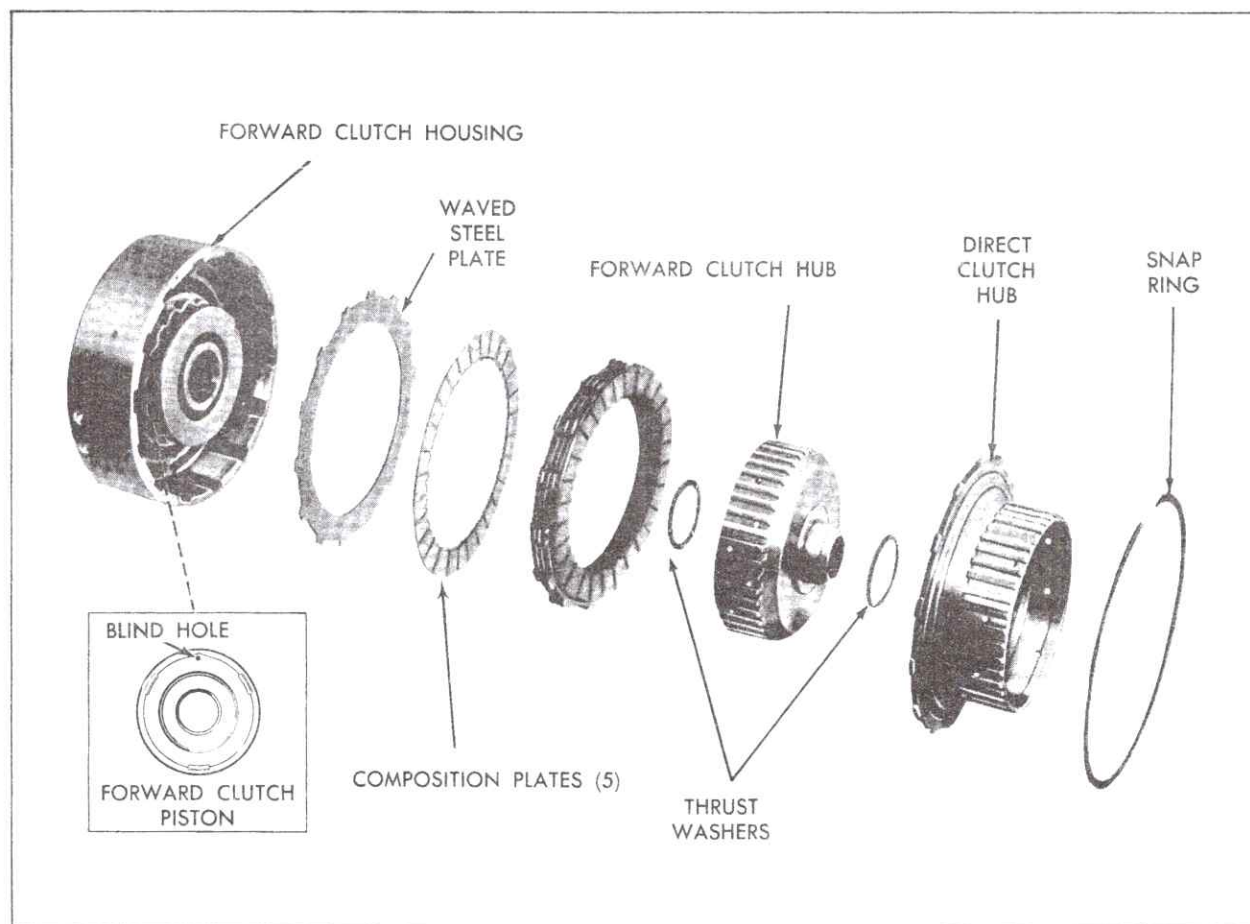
Forward Clutch and Forward and Direct Clutch Hubs Disassembled
